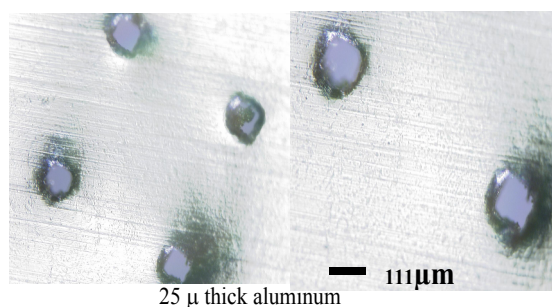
Micrograph of 25 μ m thick aluminum foil holes with too much clearance.
